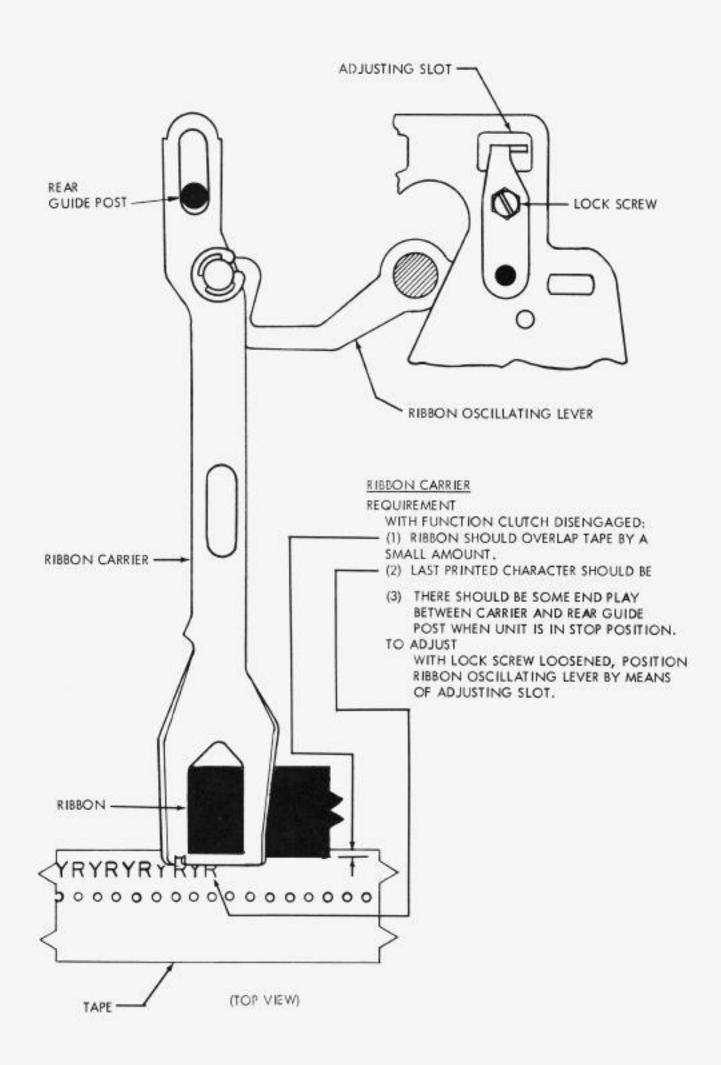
RIBBON OSCILLATING MECHANISM FOR CHADLESS TAPE
